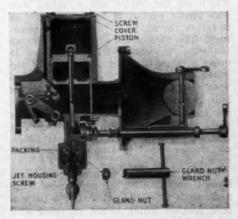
Phantom view of the Hudson carbureter showing the important parts in connection with the adjustment of the carbureter
